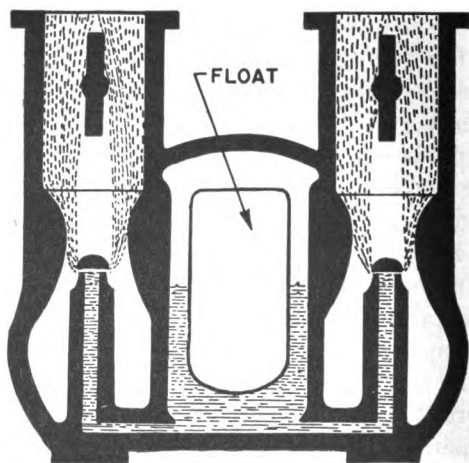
Position of fuel discharge nozzles in duplex carburetor.
